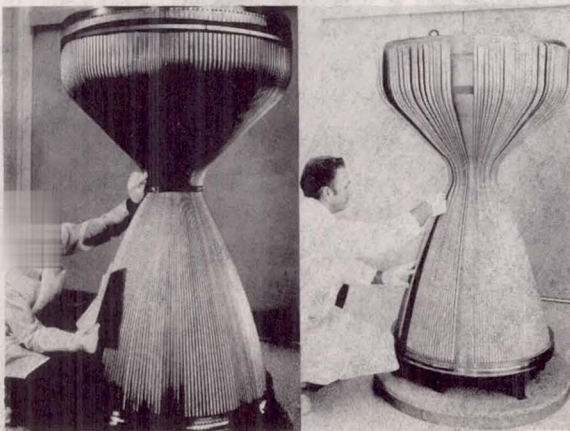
Tube assembly for KIWI engine. Furnace brazing.
